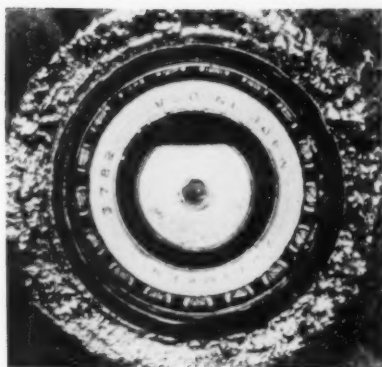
A—Outer Bearing of Heavy Duty Truck Front Wheel After 20,000 Miles Using Grease D.
